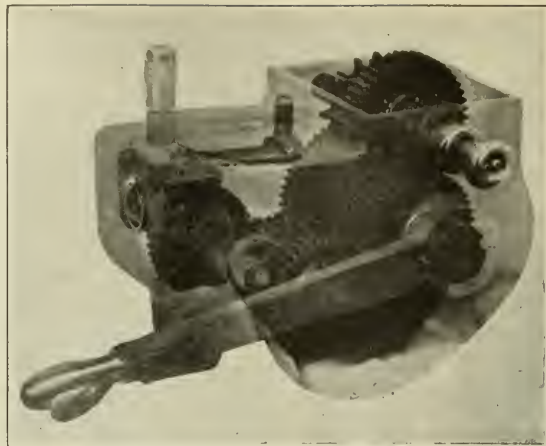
Selective Type Sliding Gear Box photographed in Two Exposures to show Internal Construction
